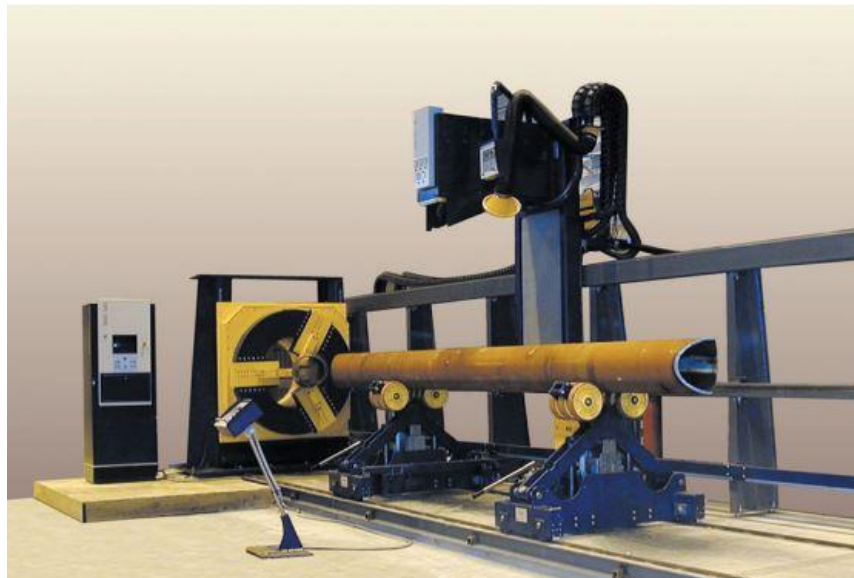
End cutting machine [Wardenier *et al.*, 2010].
